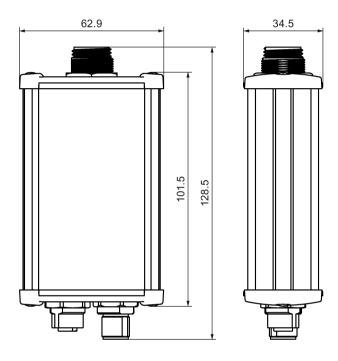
Dimension drawing of the PC adapter for SIMATIC RF-DIAG (all dimensions in mm)
